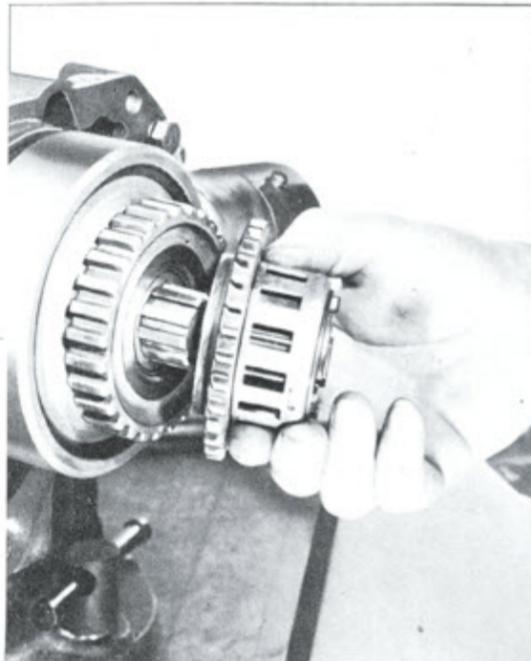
Cage and Cam Should Be Removed from Transmission Main Shaft as a Unit
